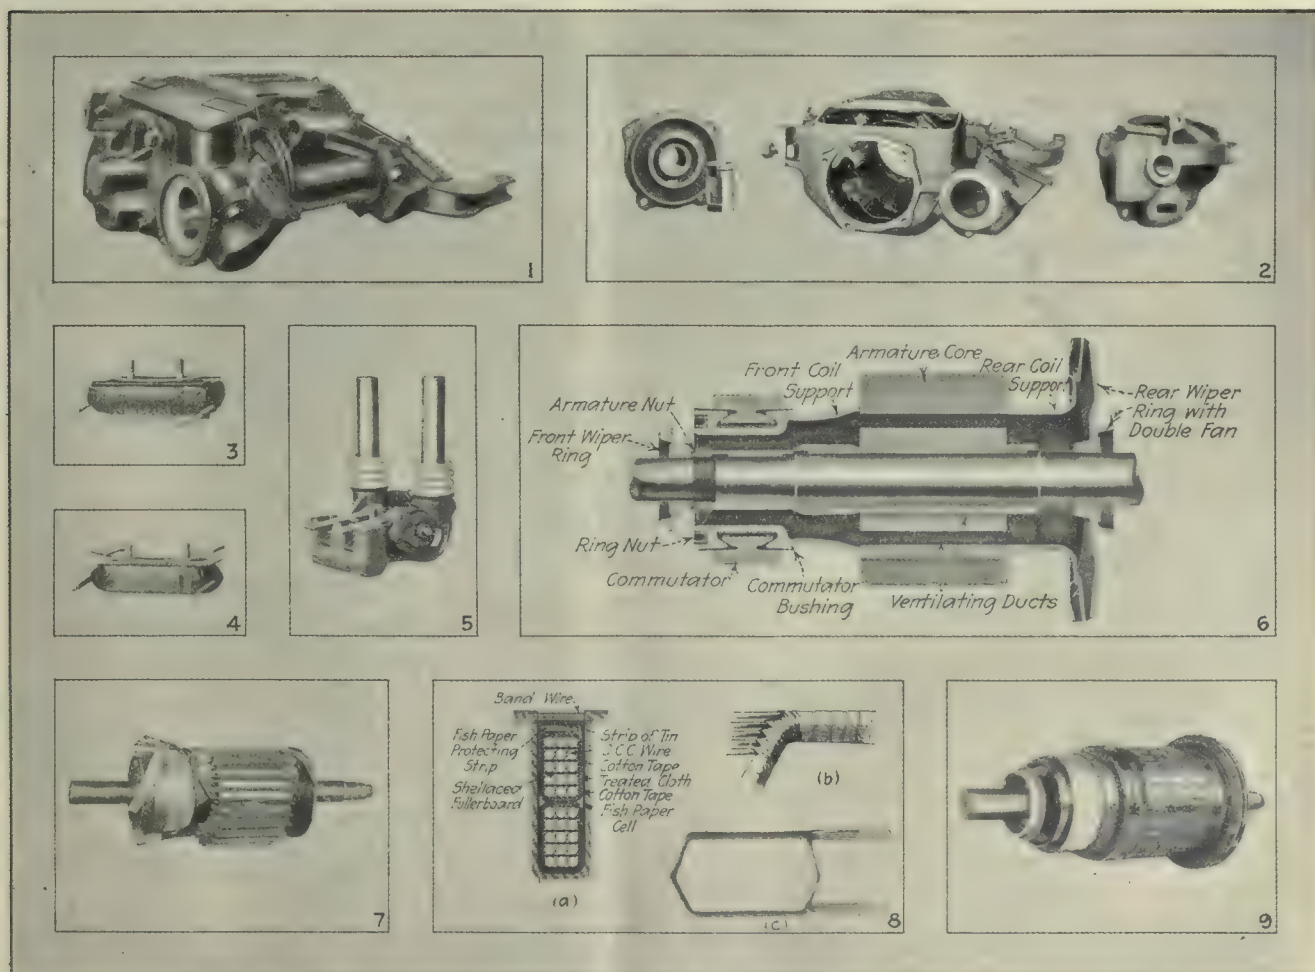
A typical 50-hp., 600-volt box-frame commutating pole railway motor. Fig. 2—Motor frame complete with armature bearing housing removed. Fig. 3—Main field coil and pole. Fig. 4—Commutating coil and pole. Fig. 5—Brushholder. Fig. 6—
